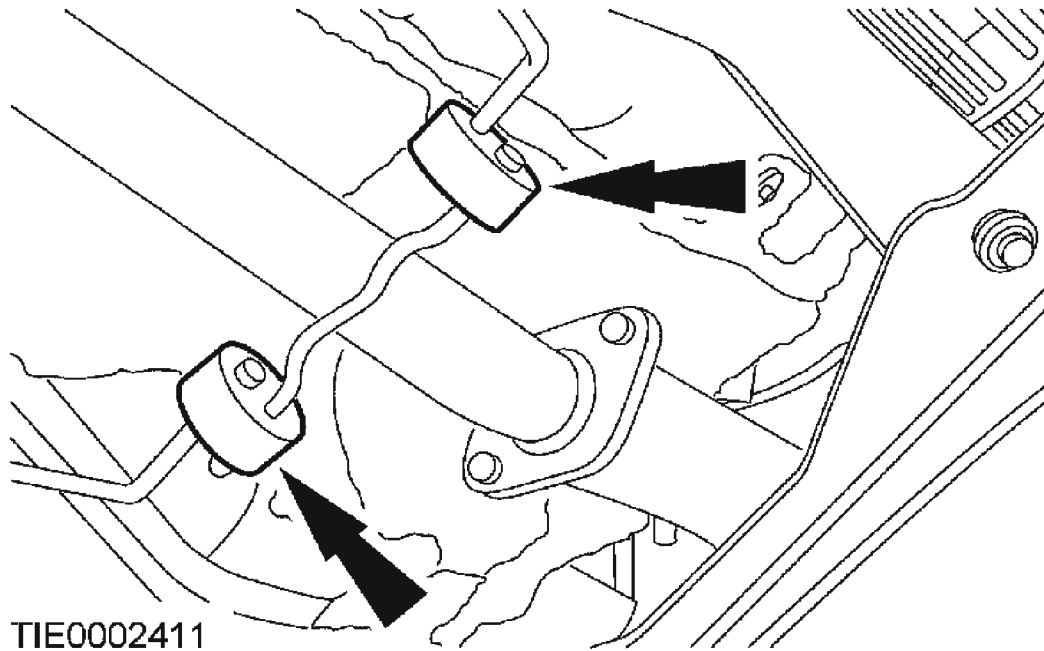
Installing Tailpipe And Muffler Assembly To Front Exhaust System
